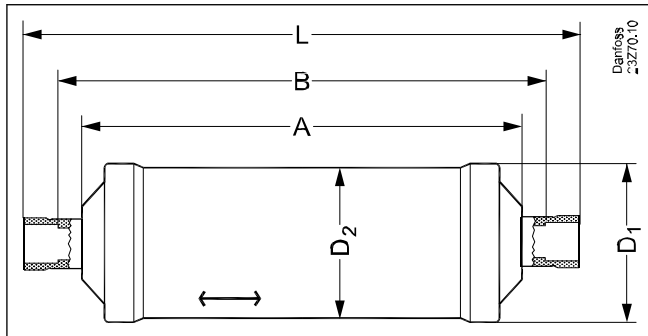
Solder connection (cu-plated 08-16 cu.in)
